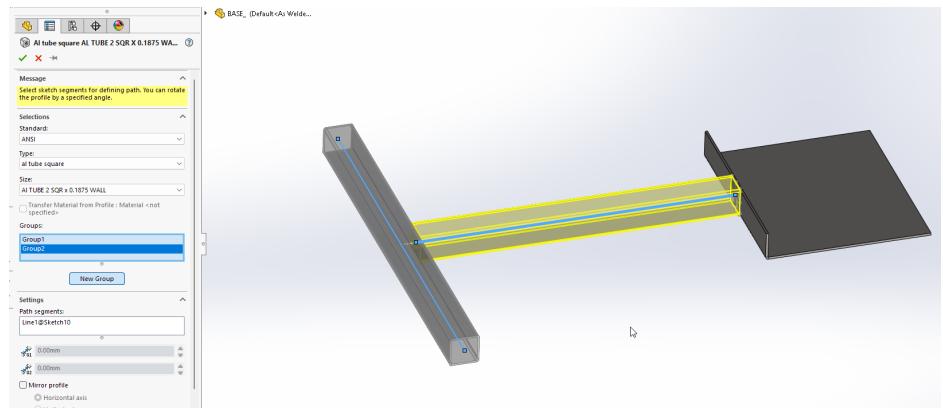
Extruding the tubular sections using Solidworks Weldments
